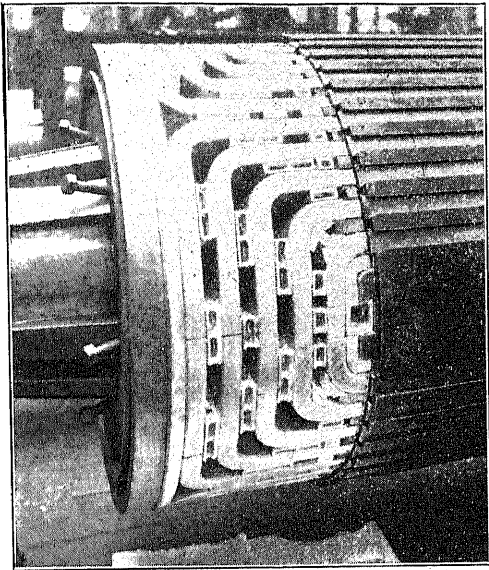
VIEW OF END OF ROTOR OF A 35,300-KV-A. 1500 REV. PER MIN. STEAM TURBINE GENERATOR ROTOR
